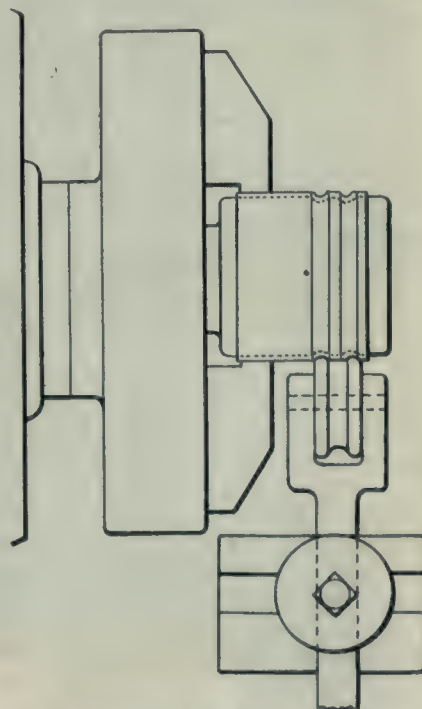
METHOD OF SPINNING GROOVES ON SLEEVE.
